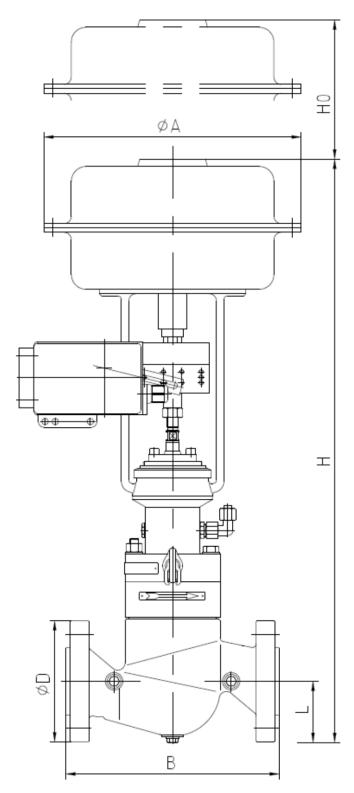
Dimensional drawing HON C210 with pneumatic actuator
